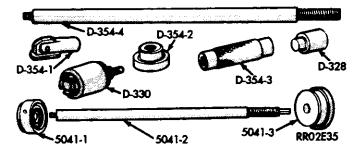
Right (Disconnect) Axle Housing Service Tools
